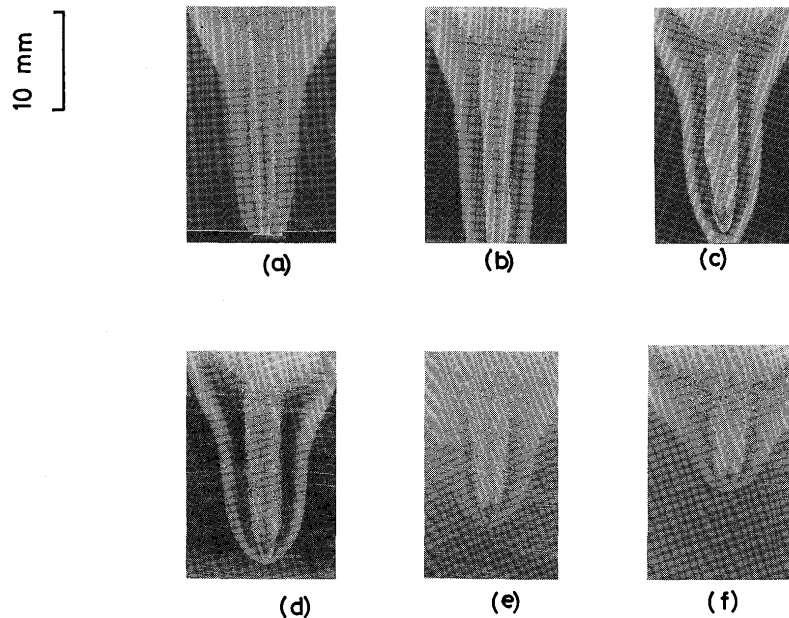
Macro-photographs for cross-sectional HT80 welds of 30KJ/cm weld heat input in various  $\alpha_b$  parameters.
